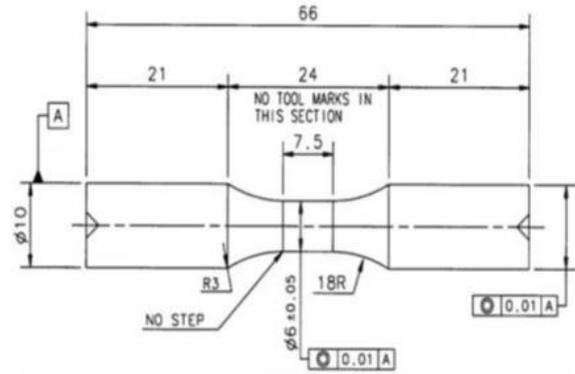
The dimensions of the specimen for Rotating bending fatigue specimens test refer to ISO test standard 1143 (1975).
